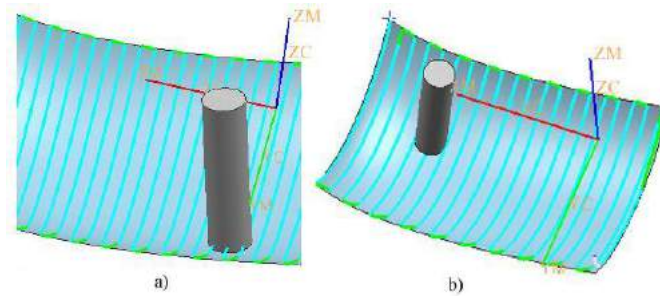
Tool paths for 5-axis machining by the CMM (a) and the proposed method (b)
